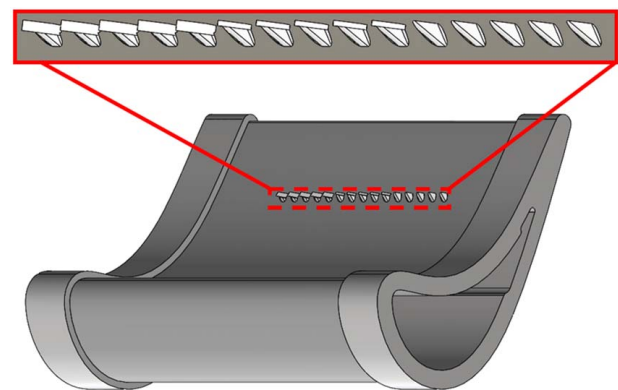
View of blade geometry including a close-up view of 50%, 25%, and baseline film holes
